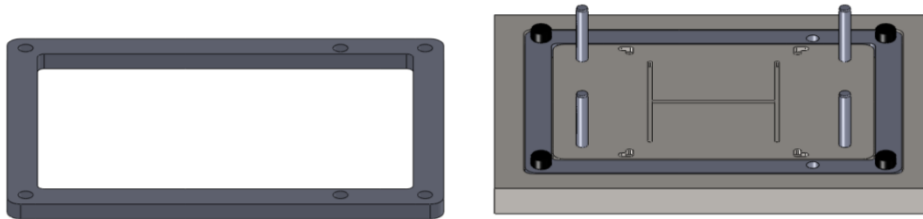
The support frame to fit into the border groove in the bending jig. The support frame can be placed on the bending jig and bolted as shown on the right side of the figure. The mother-plate can be stuck to the support frame and after machining the plate, the support frame along with the plate can be directly mounted on the thrust stand.
